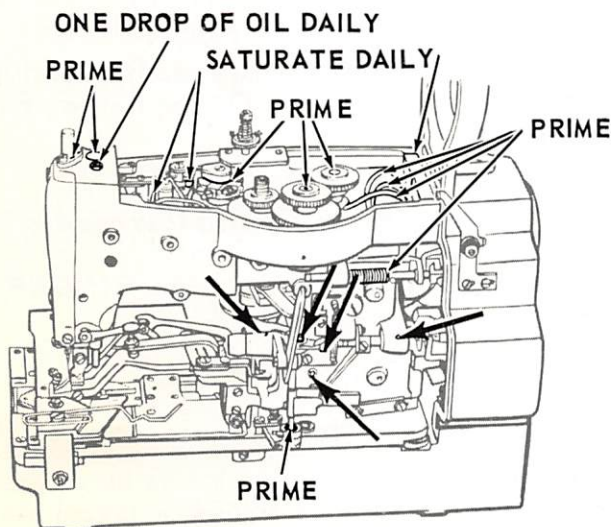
Oiling Requirements of Top and Right Side of Machine
